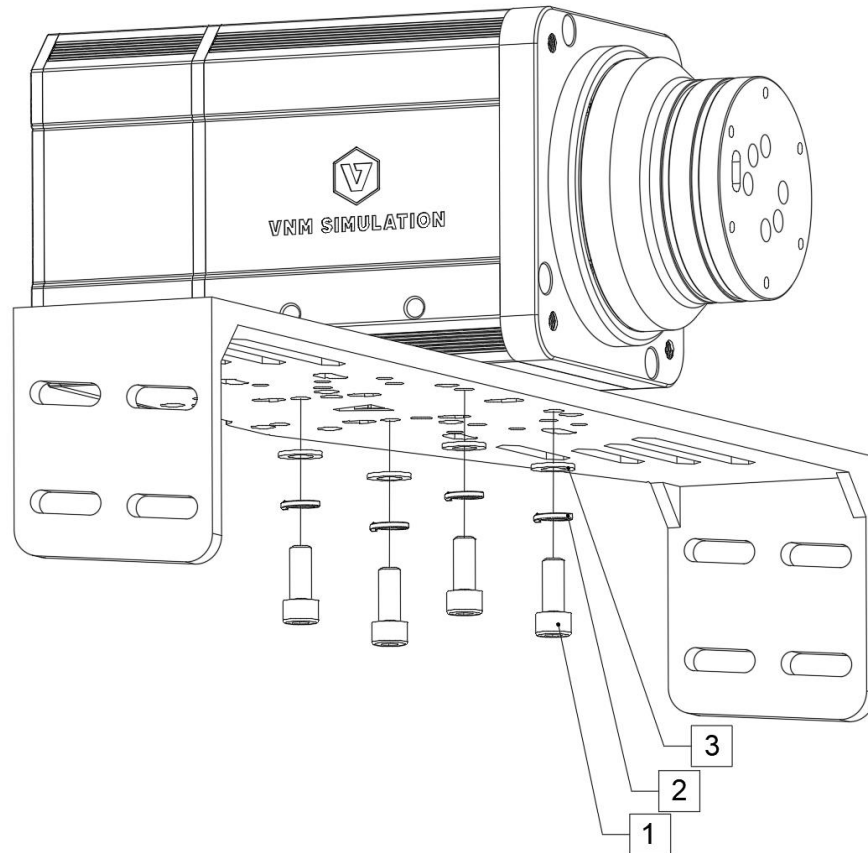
Mounting VNM Wheelbase Supreme on bottom mounting bracket.
